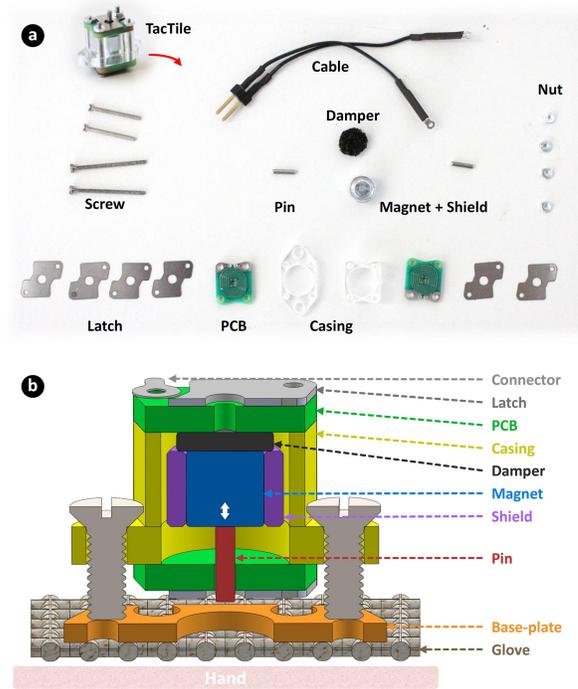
TacTiles parts and structure. A) Pre-assembly view of the TacTiles parts and B) schematic of TacTiles assembly.
